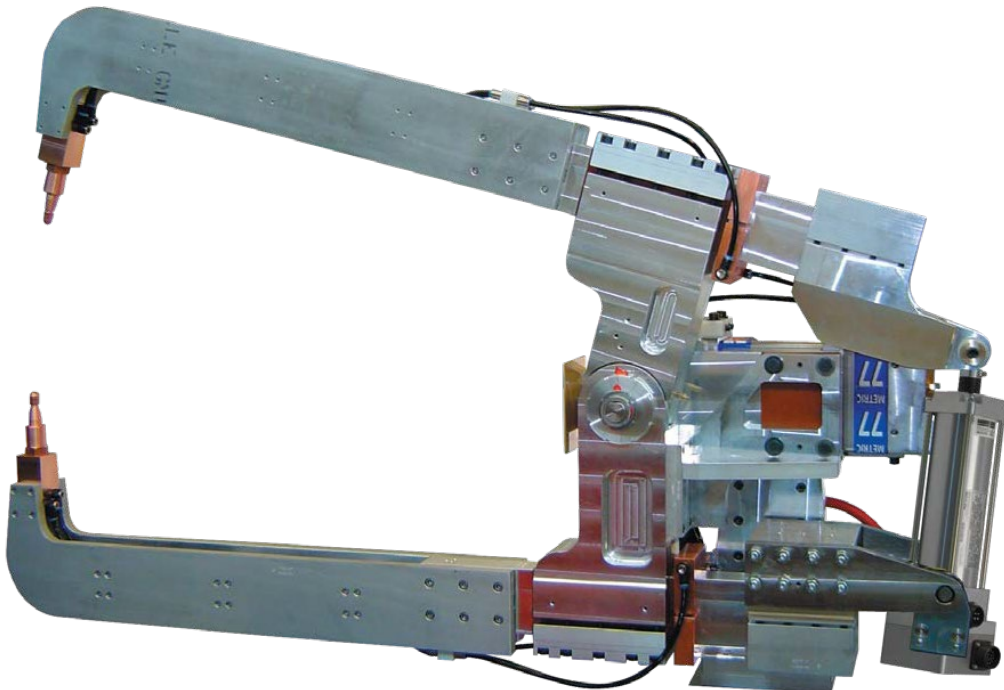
Example of ServoWeld actuator installed on "X" Style weld gun unit.
